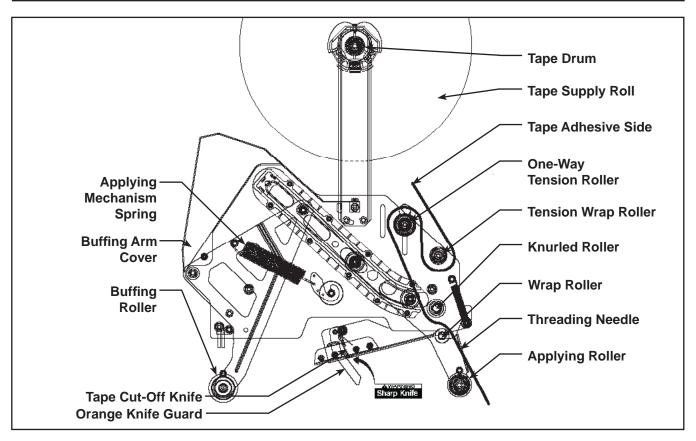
Taping Head Components/Threading Diagram - Upper Head (Left Side) View)
